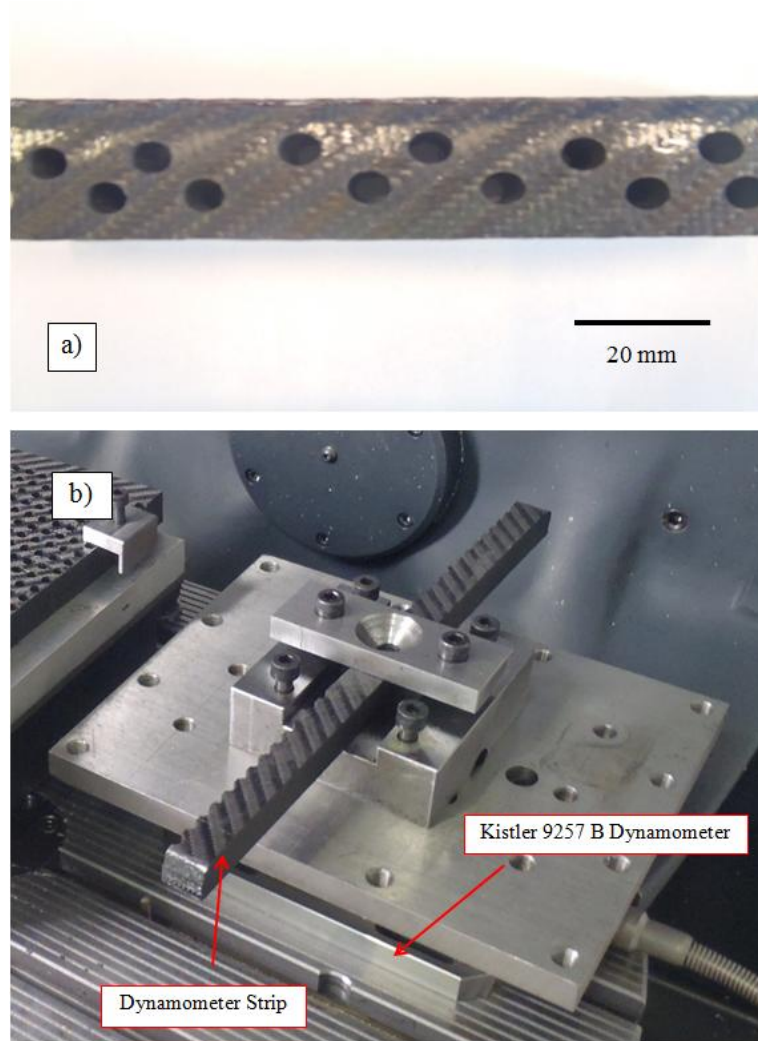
(a) Dynamometer strips used for measurement of cutting forces and damage analysis. (b) A dynamometer strip clamped on the Kistler 9257 B dynamometer
